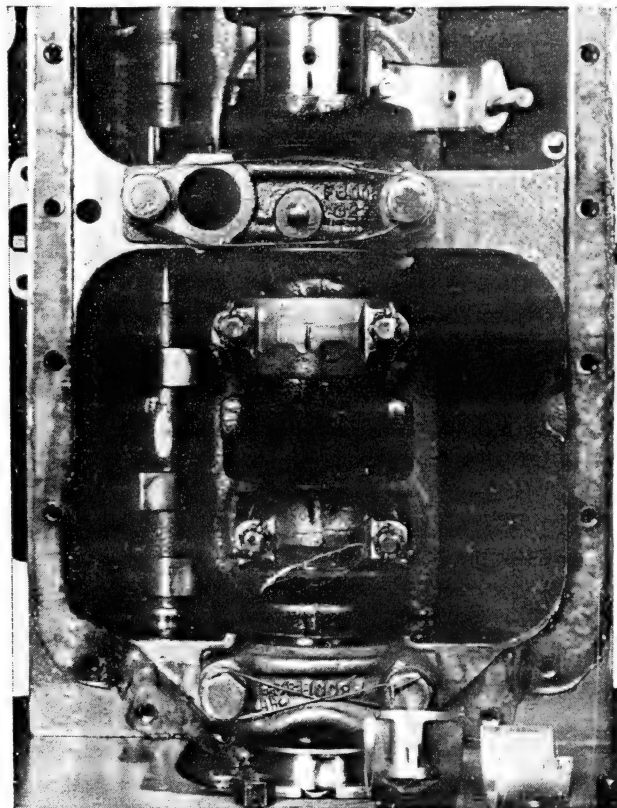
Bottom View of Engine Showing One Connecting Rod and Oil Pump Removal
